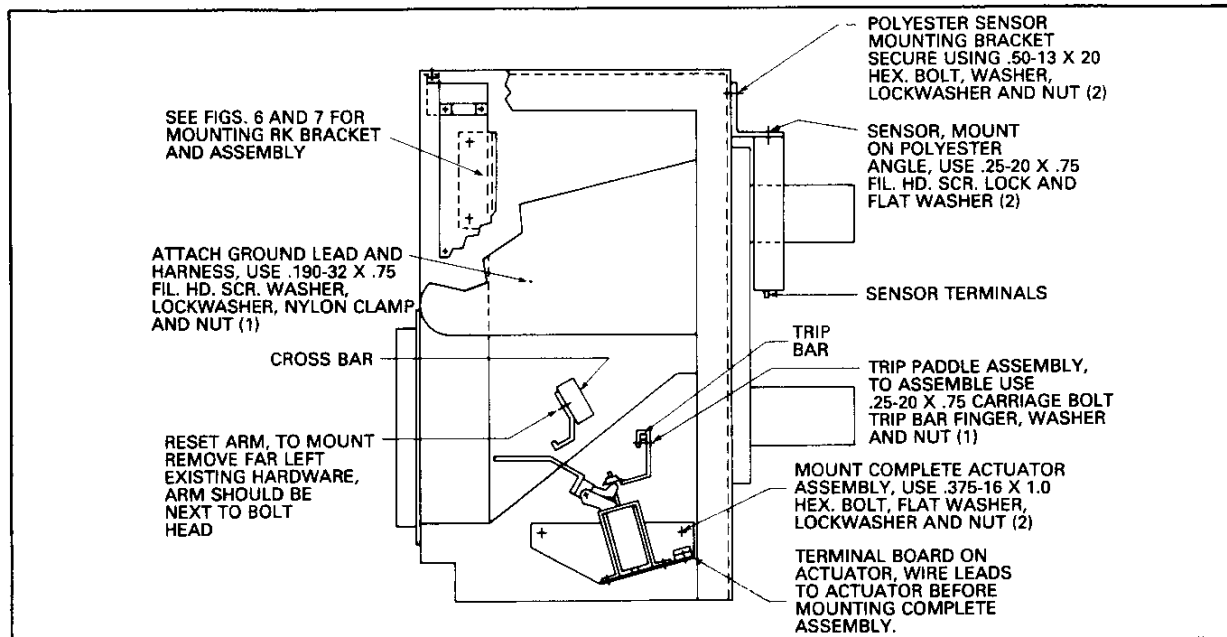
Left Inside View of Breaker Looking Through from Right Side
